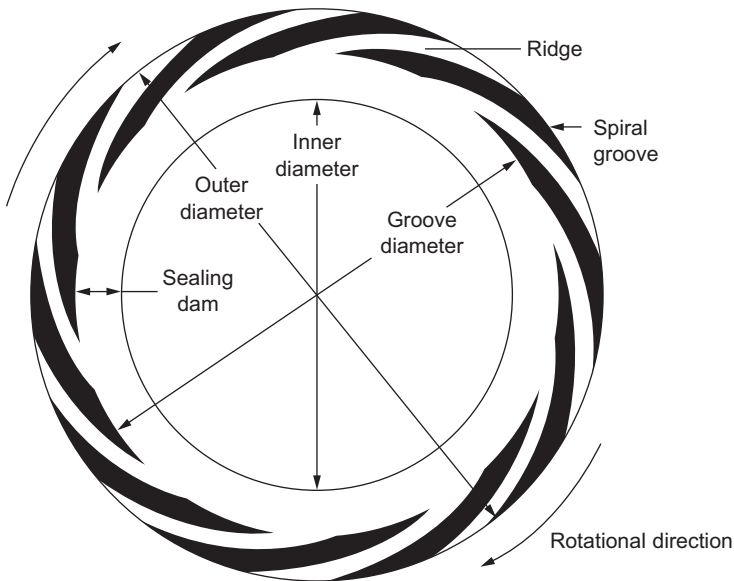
Spiral grooved mating ring (courtesy Proceedings Seventeenth Turbomachinery Symposium, Dry Gas Compressor Seals by Piyush Shah, John Crane Inc.).
